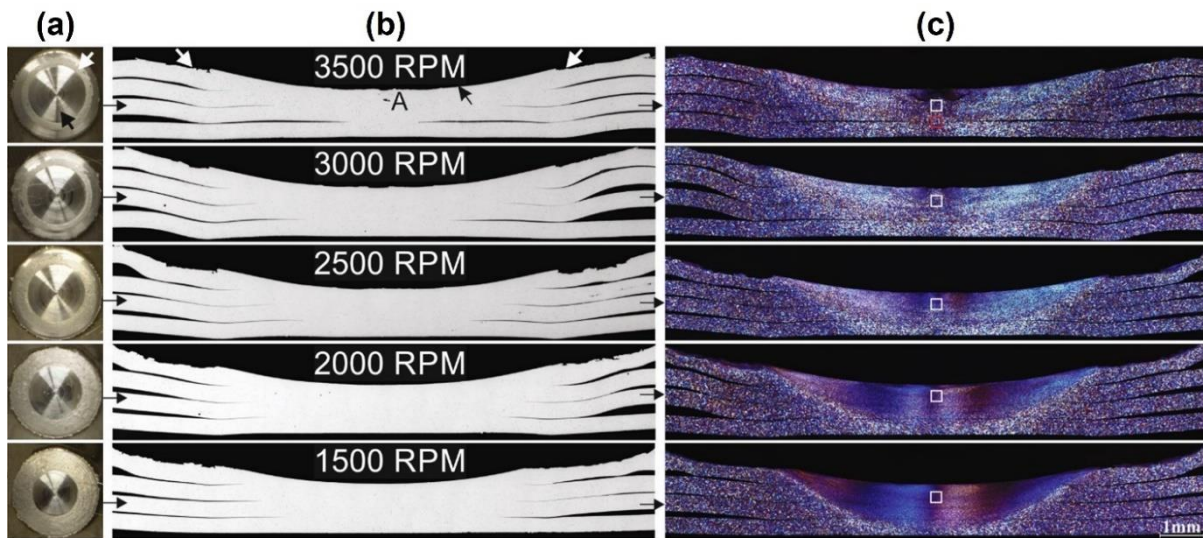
(a) Macrographs; (b) polished; (c) etched cross-section views of the welded joints from batch I at different RPM (from 3500 to 1500 RPM)
